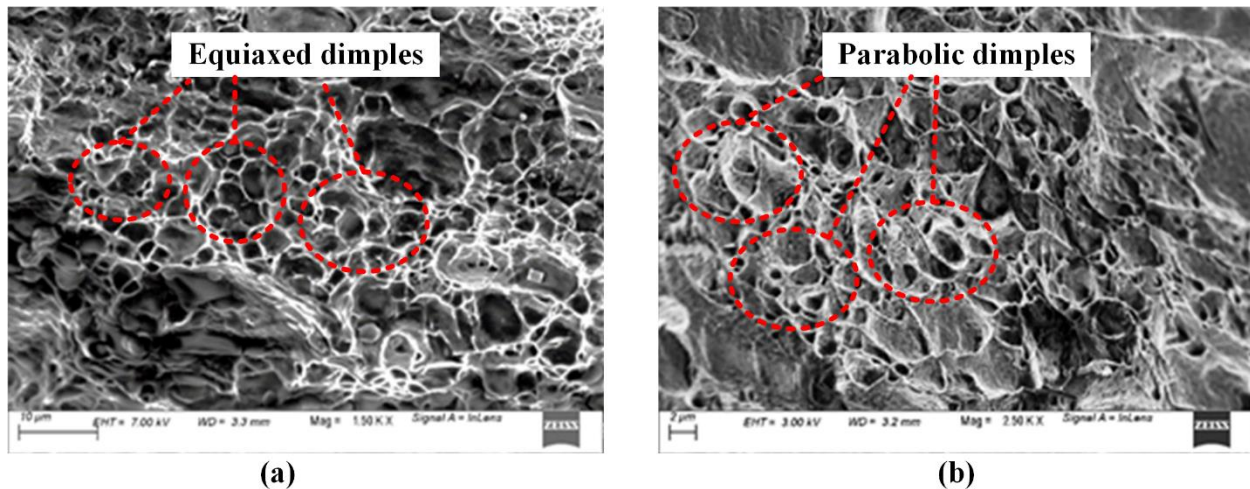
Fractured surface of the specimens tested in (a) quasi-static forming (b) shock tube based forming
